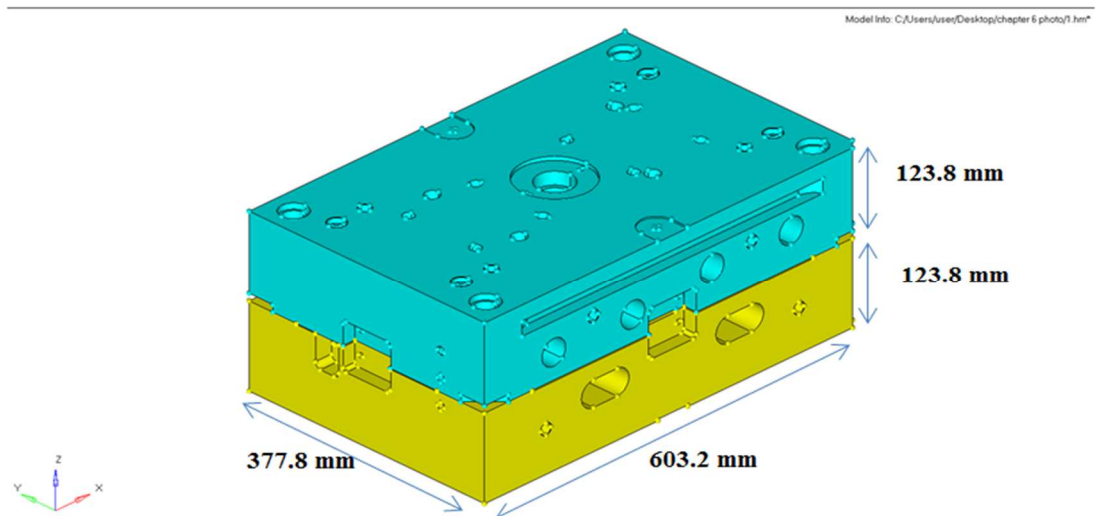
Mold block consisting core, yellow part, and cavity, blue part, from industrial partner
